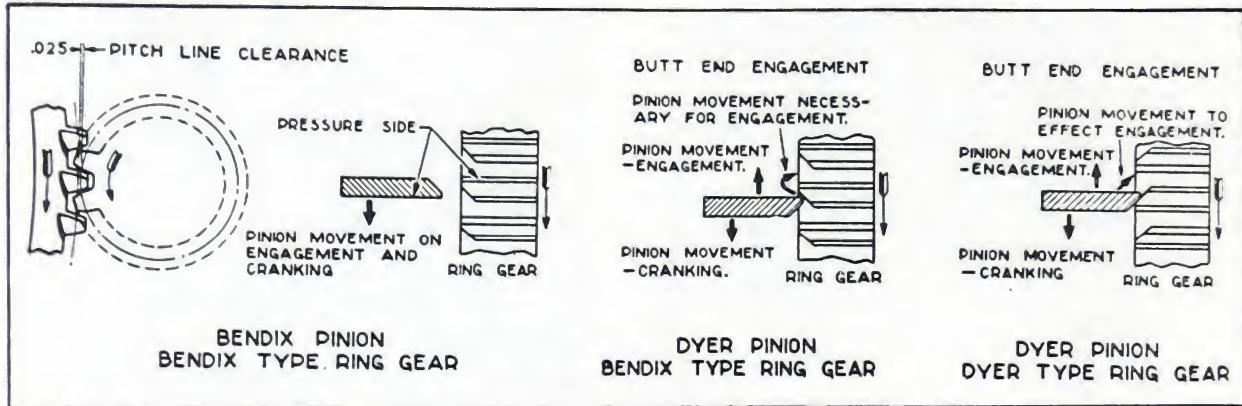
Action of Dyer type pinion upon engagement with flywheel of different chamfer
